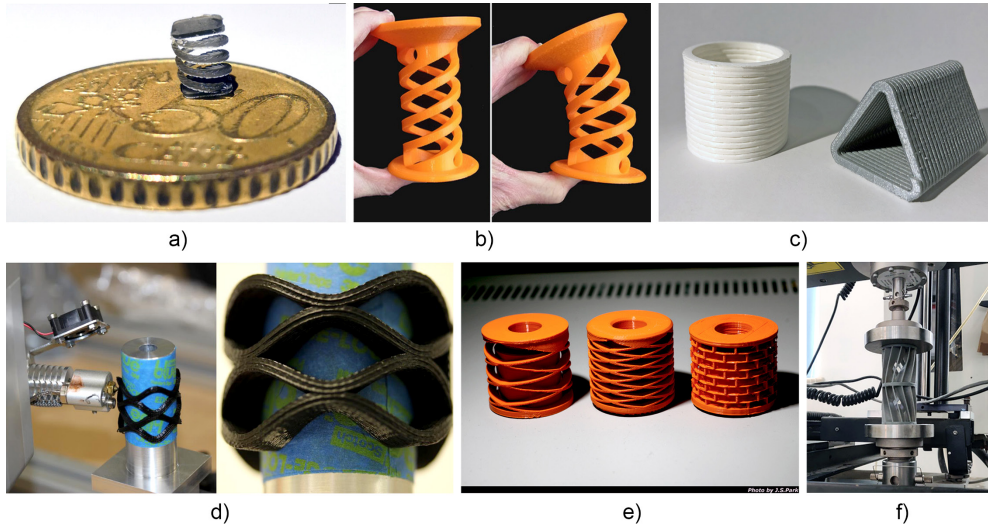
Examples of spatial 3D printed spring designs. a) Helical microspring [91]. b) Helical spring with rectangular wire cross-section [123]. c) Helical tension springs printed in upright (left) and horizontal (right) position [101]. d) Set-up to print a wave spring with optimized material extrusion direction (left) and close-up of the spring (right) [113]. e) Wave (left and middle) and stacked (right) springs [115]. f) Set-up for axial compression testing of a stack of two opposite rotation springs [117].
